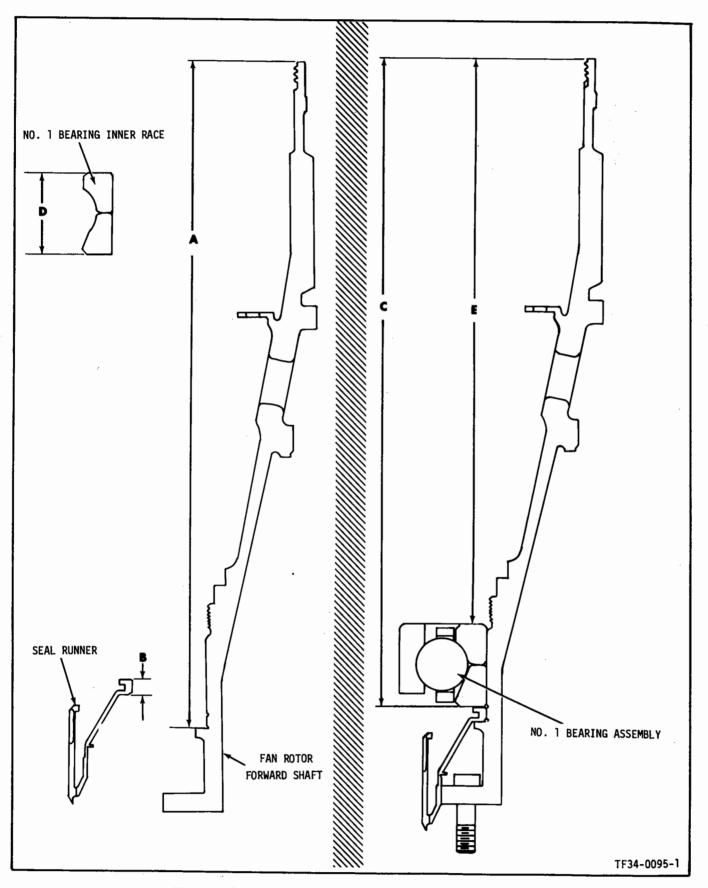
No. 1 Bearing and Seal Runner Seating Checks
